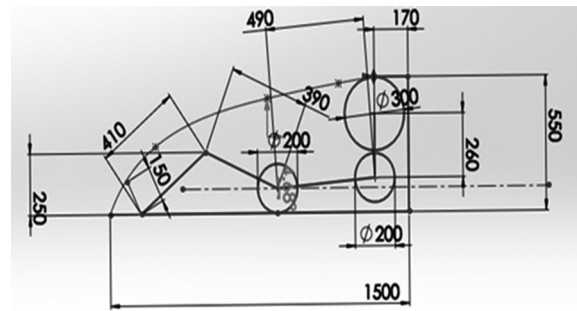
Dimensions of cockpit of three-wheel battery electric vehicle
